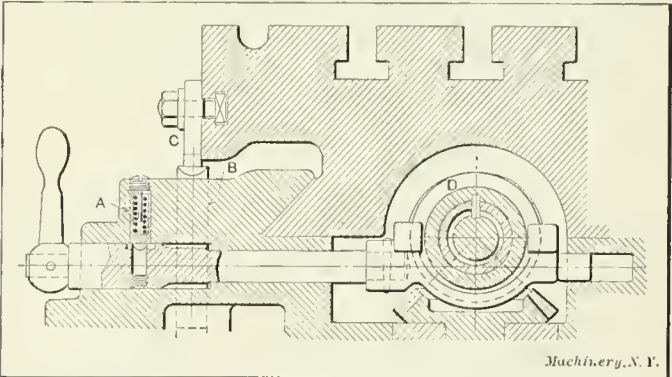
Locking Mechanism for Clutch for Milling Machine Feed-screw
